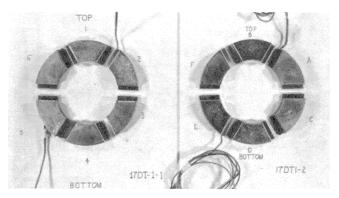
Dimpled Thrust Bearing Pads from Air Pilot Hole in Peening Support Pads Prior to Pretinning and Babbitting-7500 HP Steam Turbine, 1960.
